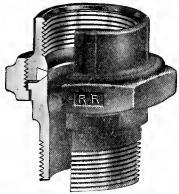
Crane Union with Outside and Inside Thread. The Crane Company.
